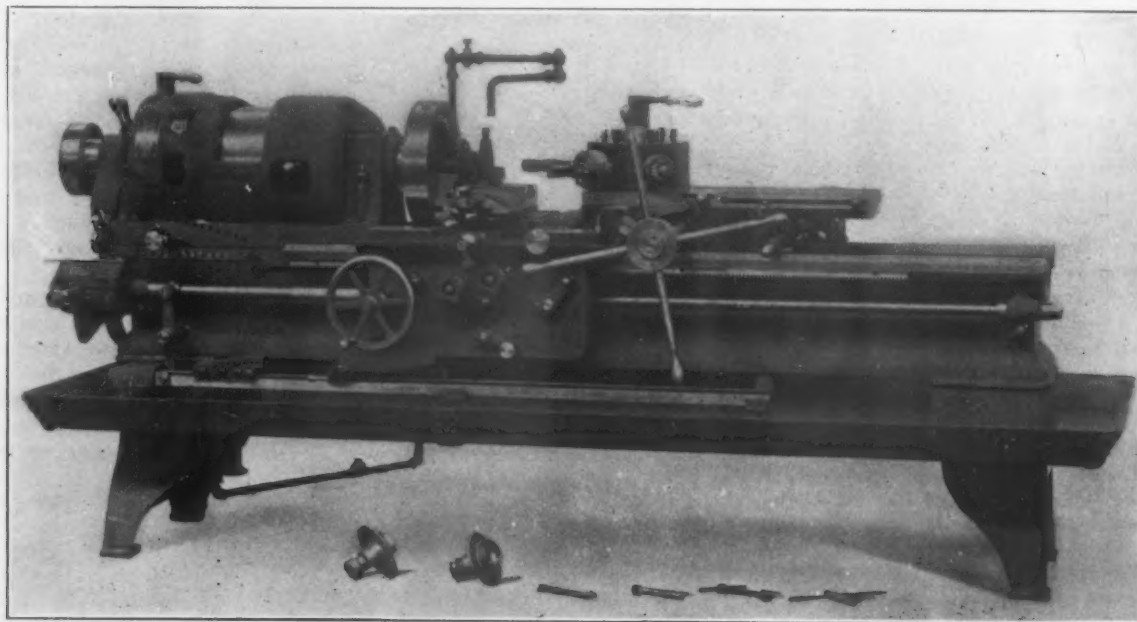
An 18-In. by 8-Ft. Patent Head, Quick Change, Gear Lathe, with Turret, Built by the Lodge & Shipley Machine Tool Company and Particularly Adapted for Turning Automobile Hubs.
